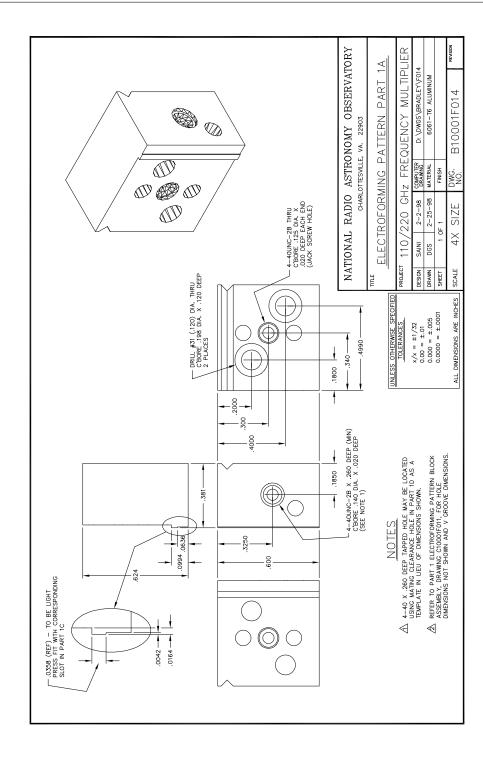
110/220 GHz frequency doubler: Mechanical details of the mandrel
